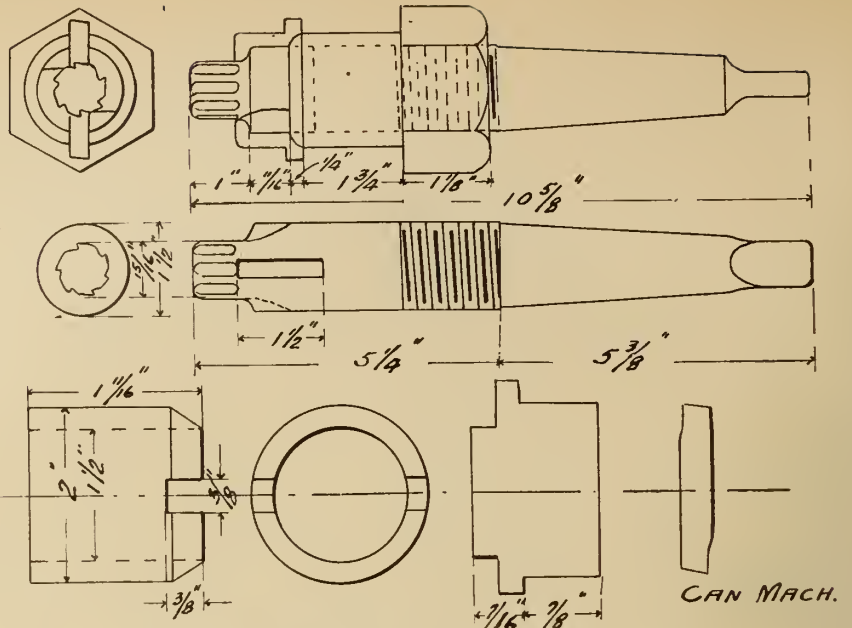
Flue Sheet Cutter Used in M.C.R. Shops.
